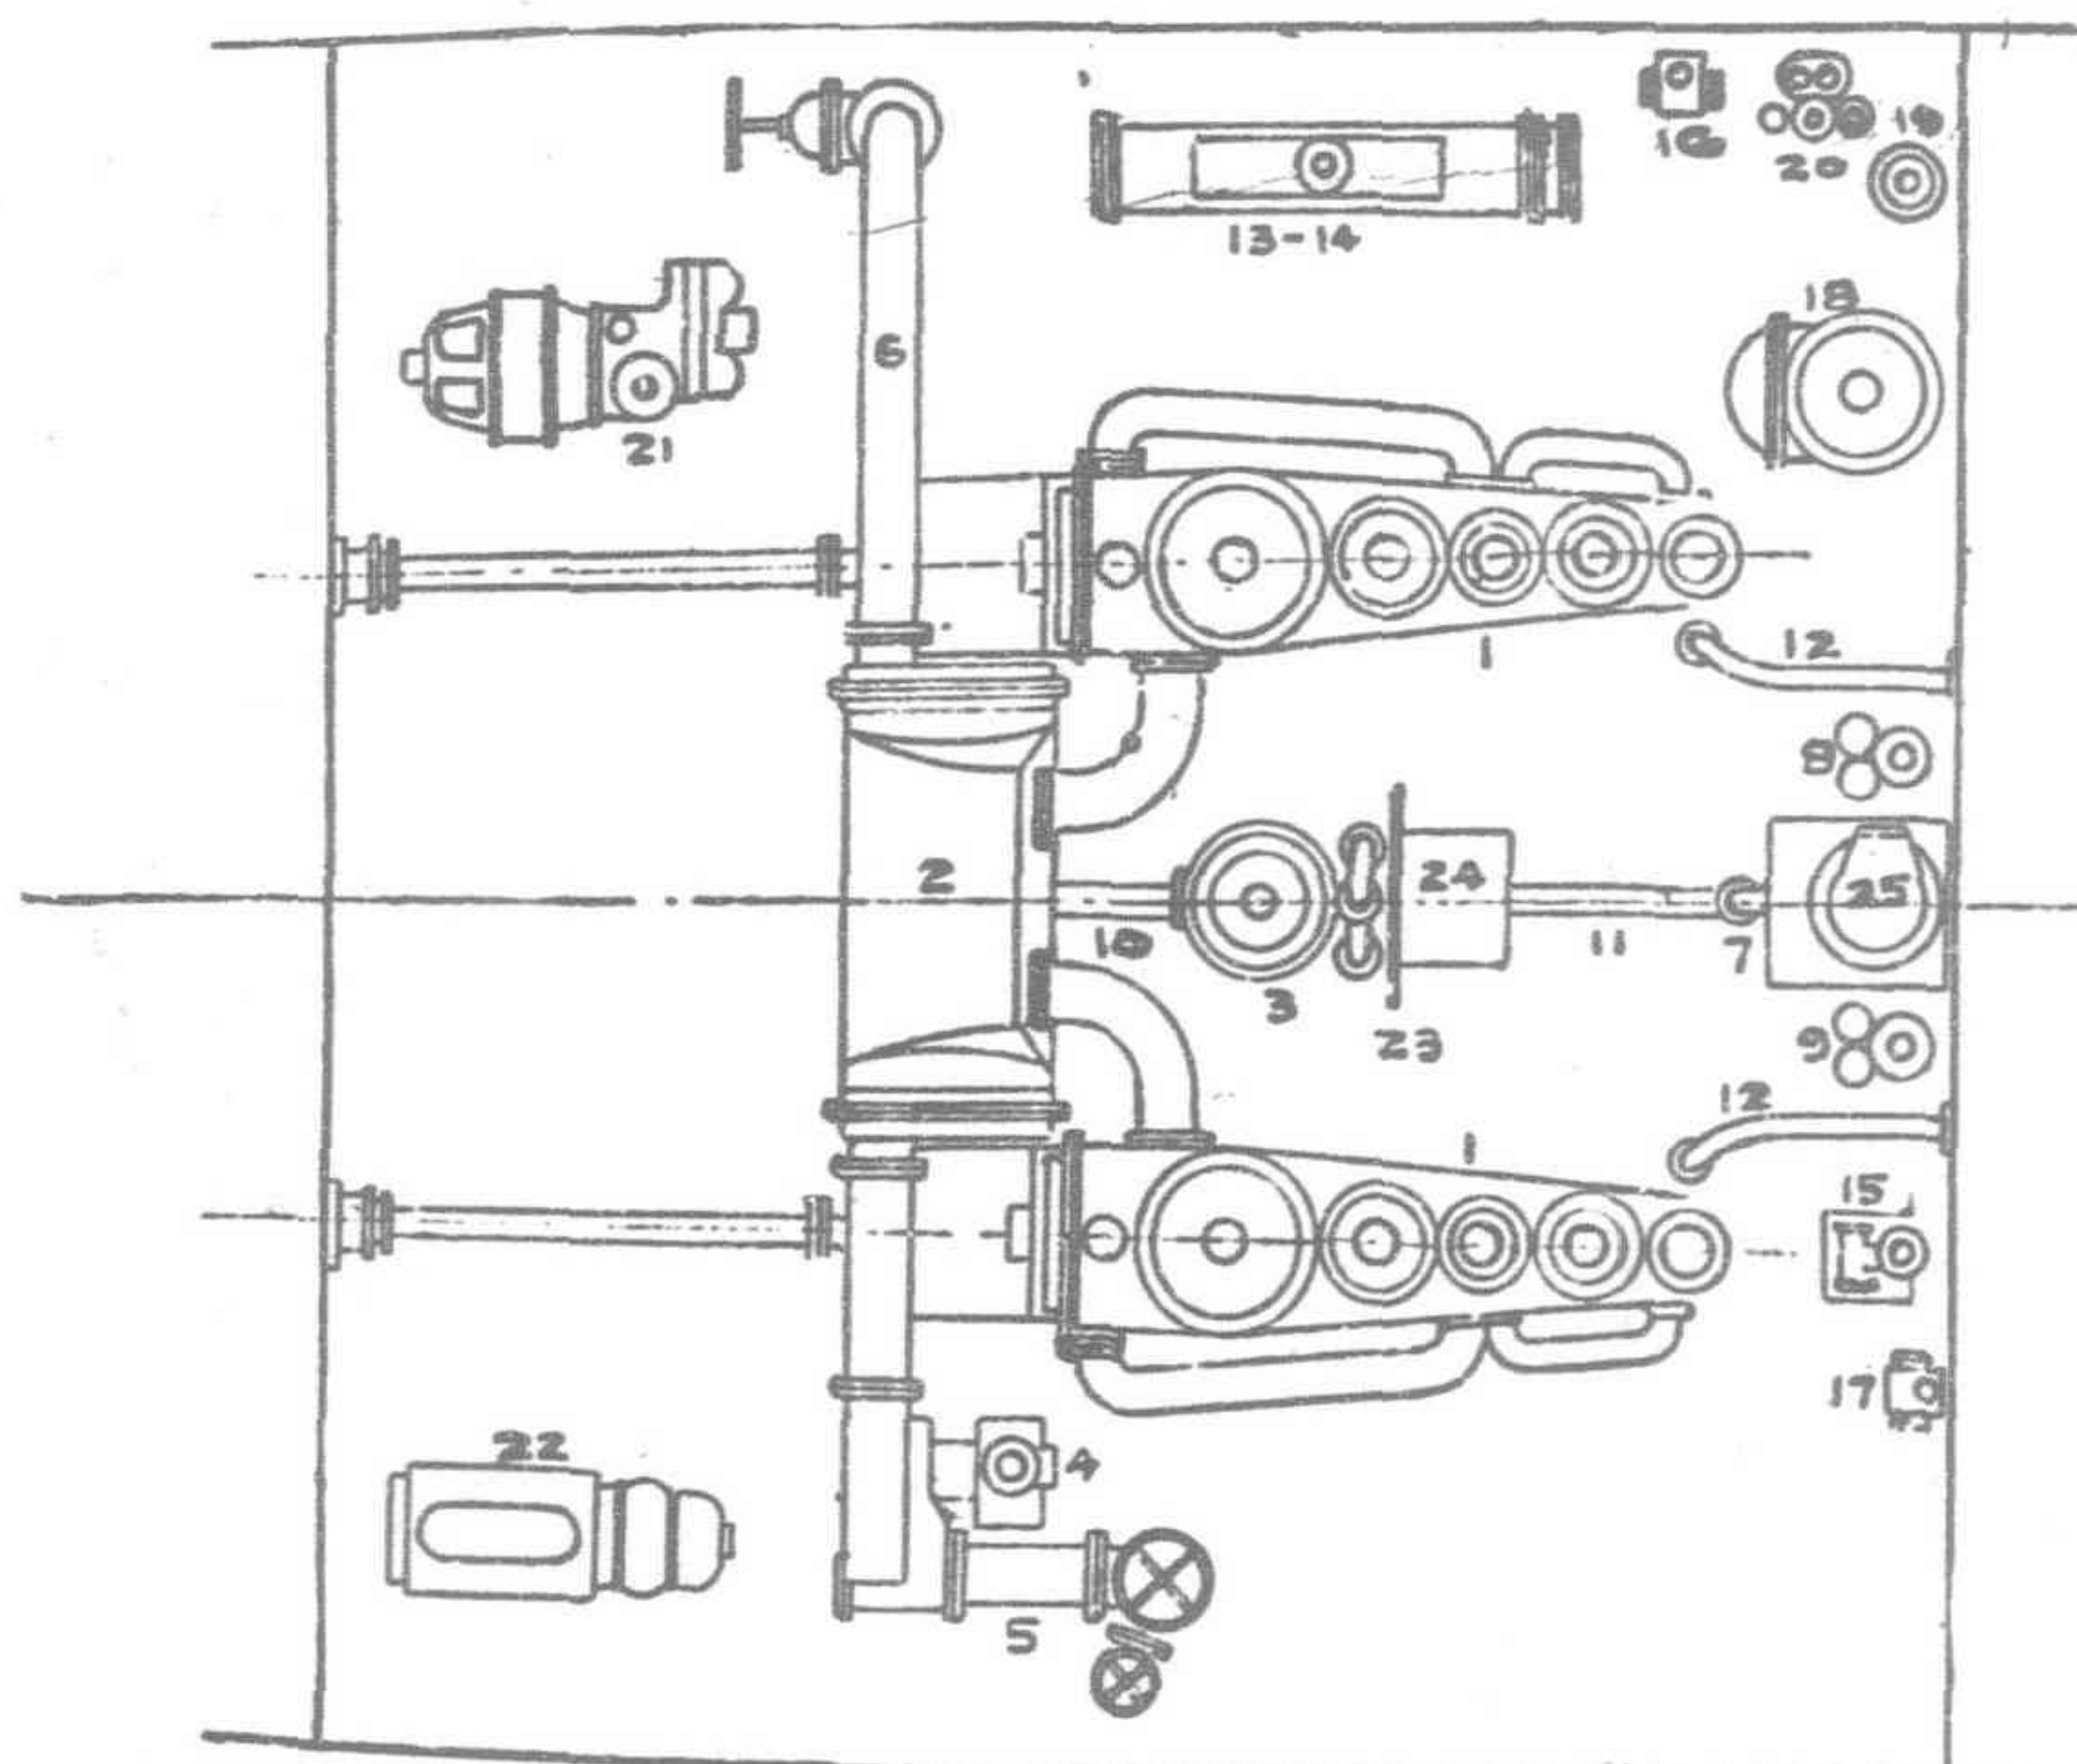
Arrangement Of Main and Auxiliary Machinery
